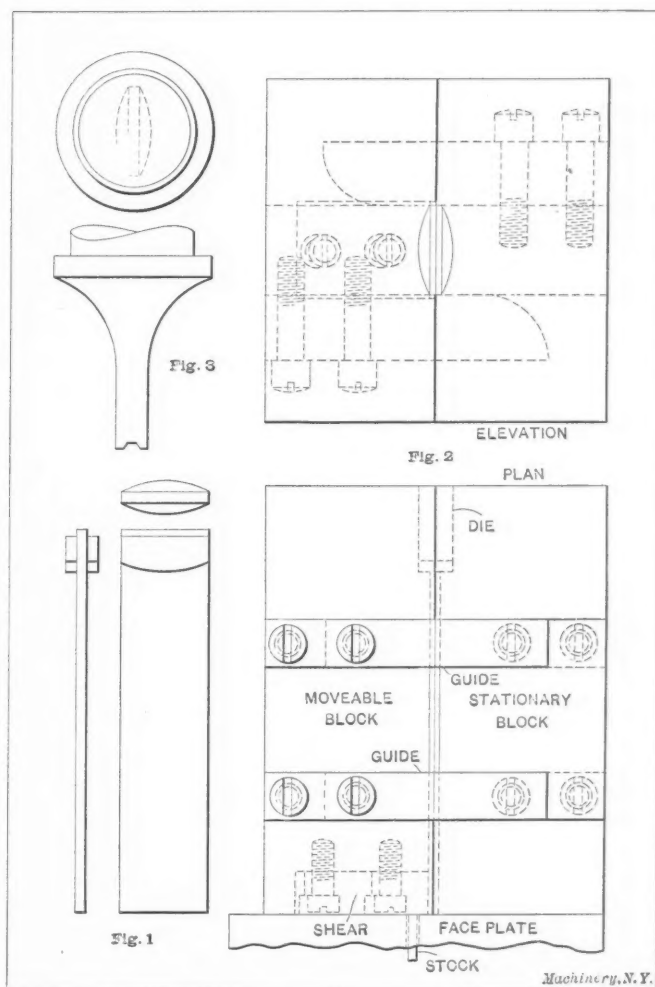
Finished View of Blades made from Copper Strips. Fig. 2. Forging Dies employed on the Job. Fig. 3. Punch for Upsetting Ends of Blades
